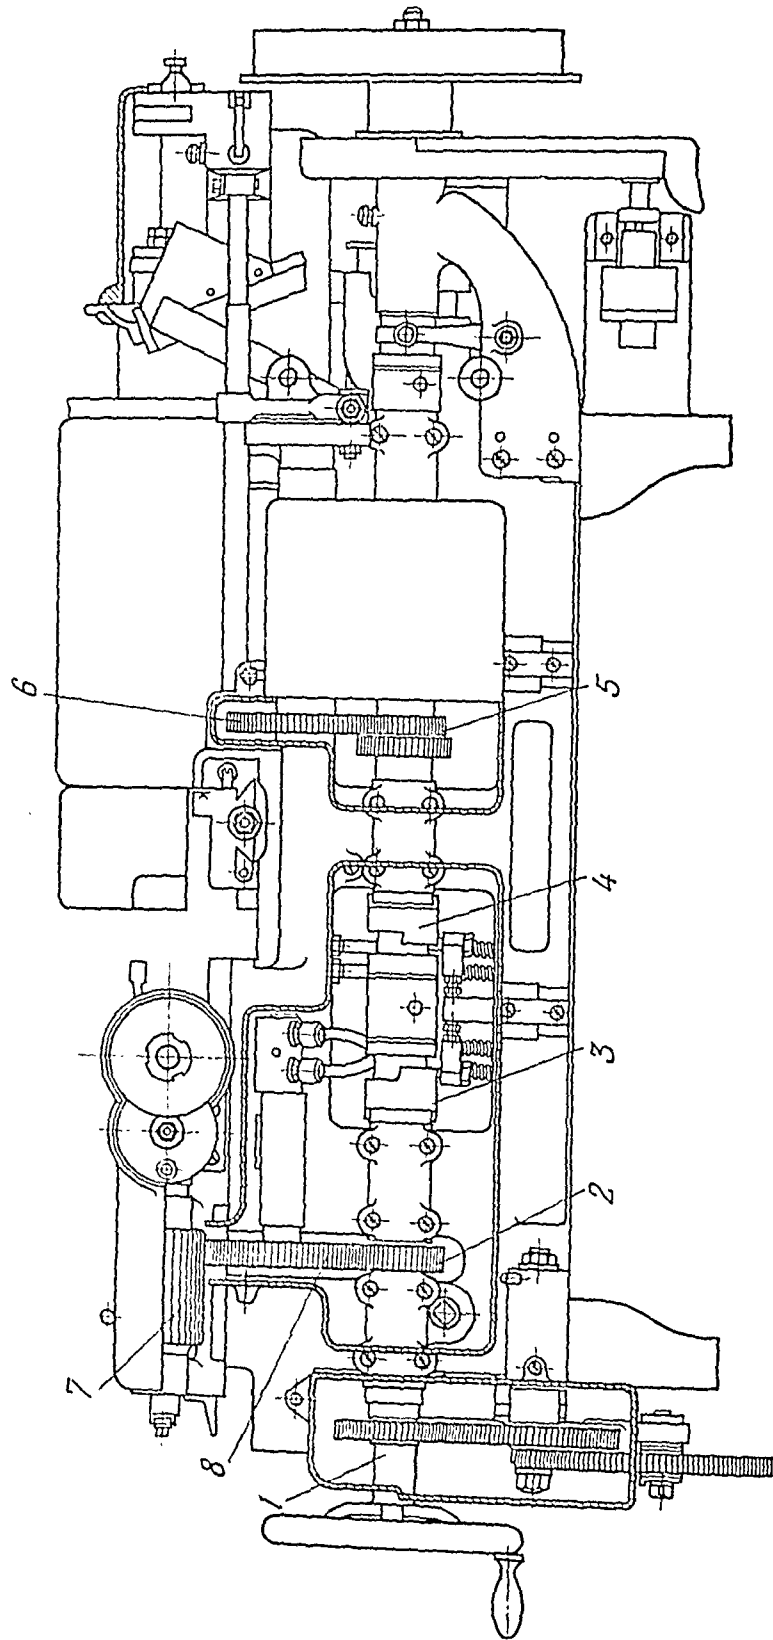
Automatic screw machine (viewed from the side of the auxiliary rear camshaft)
